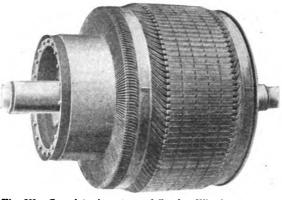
Complete Armature of Crocker-Wheeler Company Engine-Type Generator.
